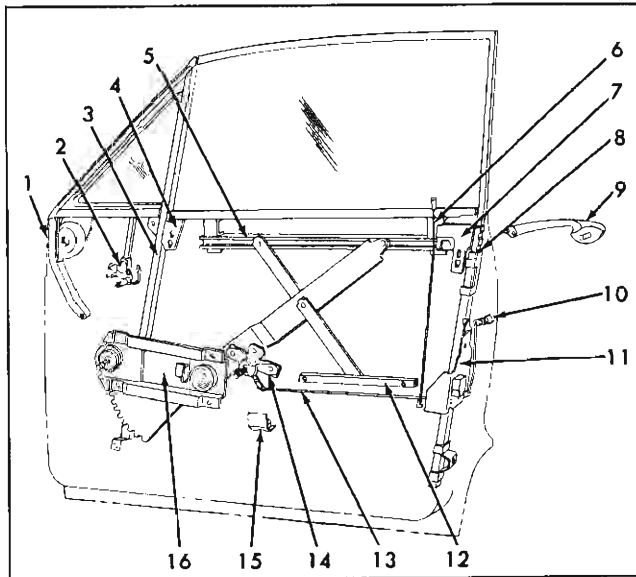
Front Door Assembly—39, 47, 67 Styles
